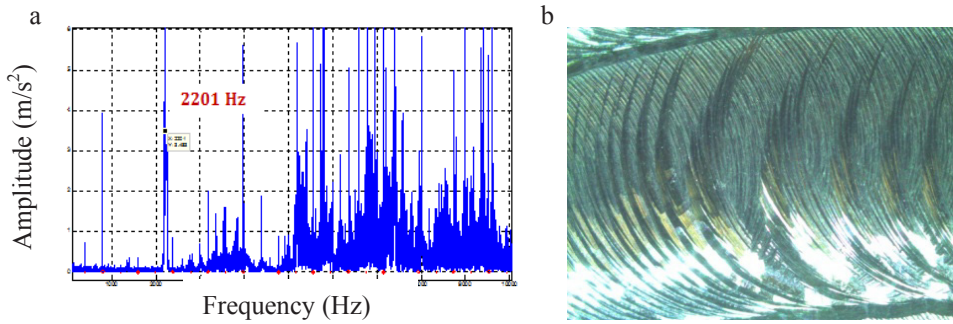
(a) Signal of the accelerometer under chatter conditions; (b) Chatter marks on the workpiece surface.
